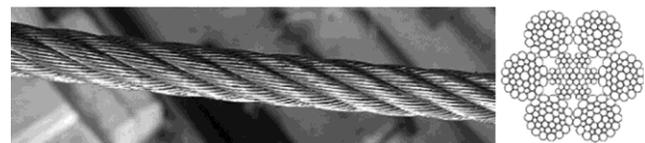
6 x 36 Warrington-Seale wire rope sample and its cross sectional view.
